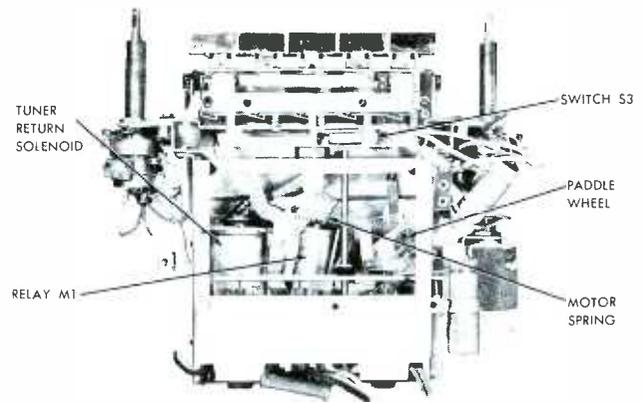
The Cadillac Model 7264165 Tuner Mechanism.
